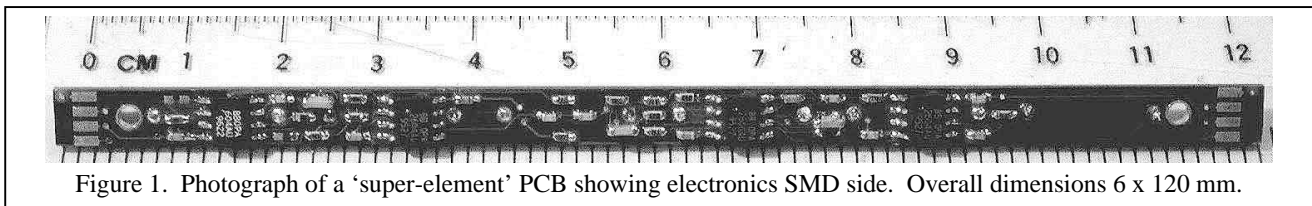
Photograph of a 'super-element' PCB showing electronics SMD side. Overall dimensions 6 x 120 mm.
